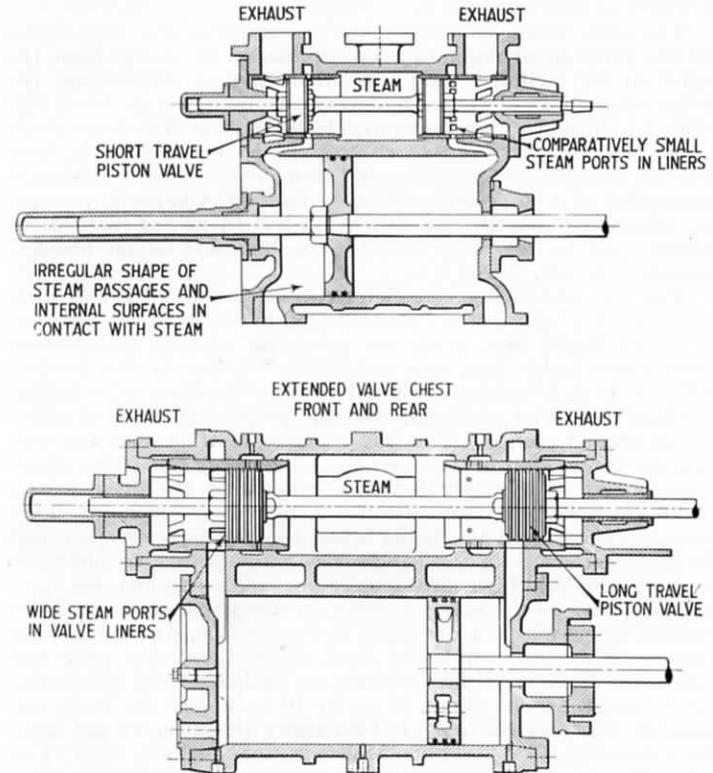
ABOVE: OLD PATTERN CYLINDER AND VALVE. BELOW: CYLINDER VALVE AND PISTON OF NEW STANDARD LOCOMOTIVES, L.M.S.R.
